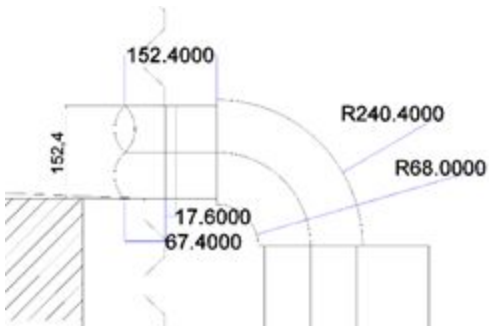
Inlet Part of the Inlet Pipe Component of the Tank
